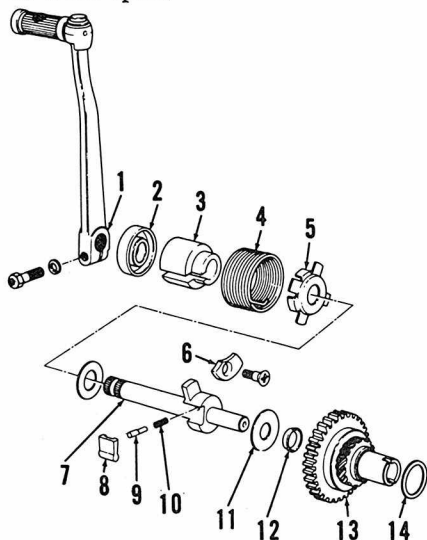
Kickstarter used on TS and TC 90 models. Engine may be started in any gear as long as clutch is disengaged.
